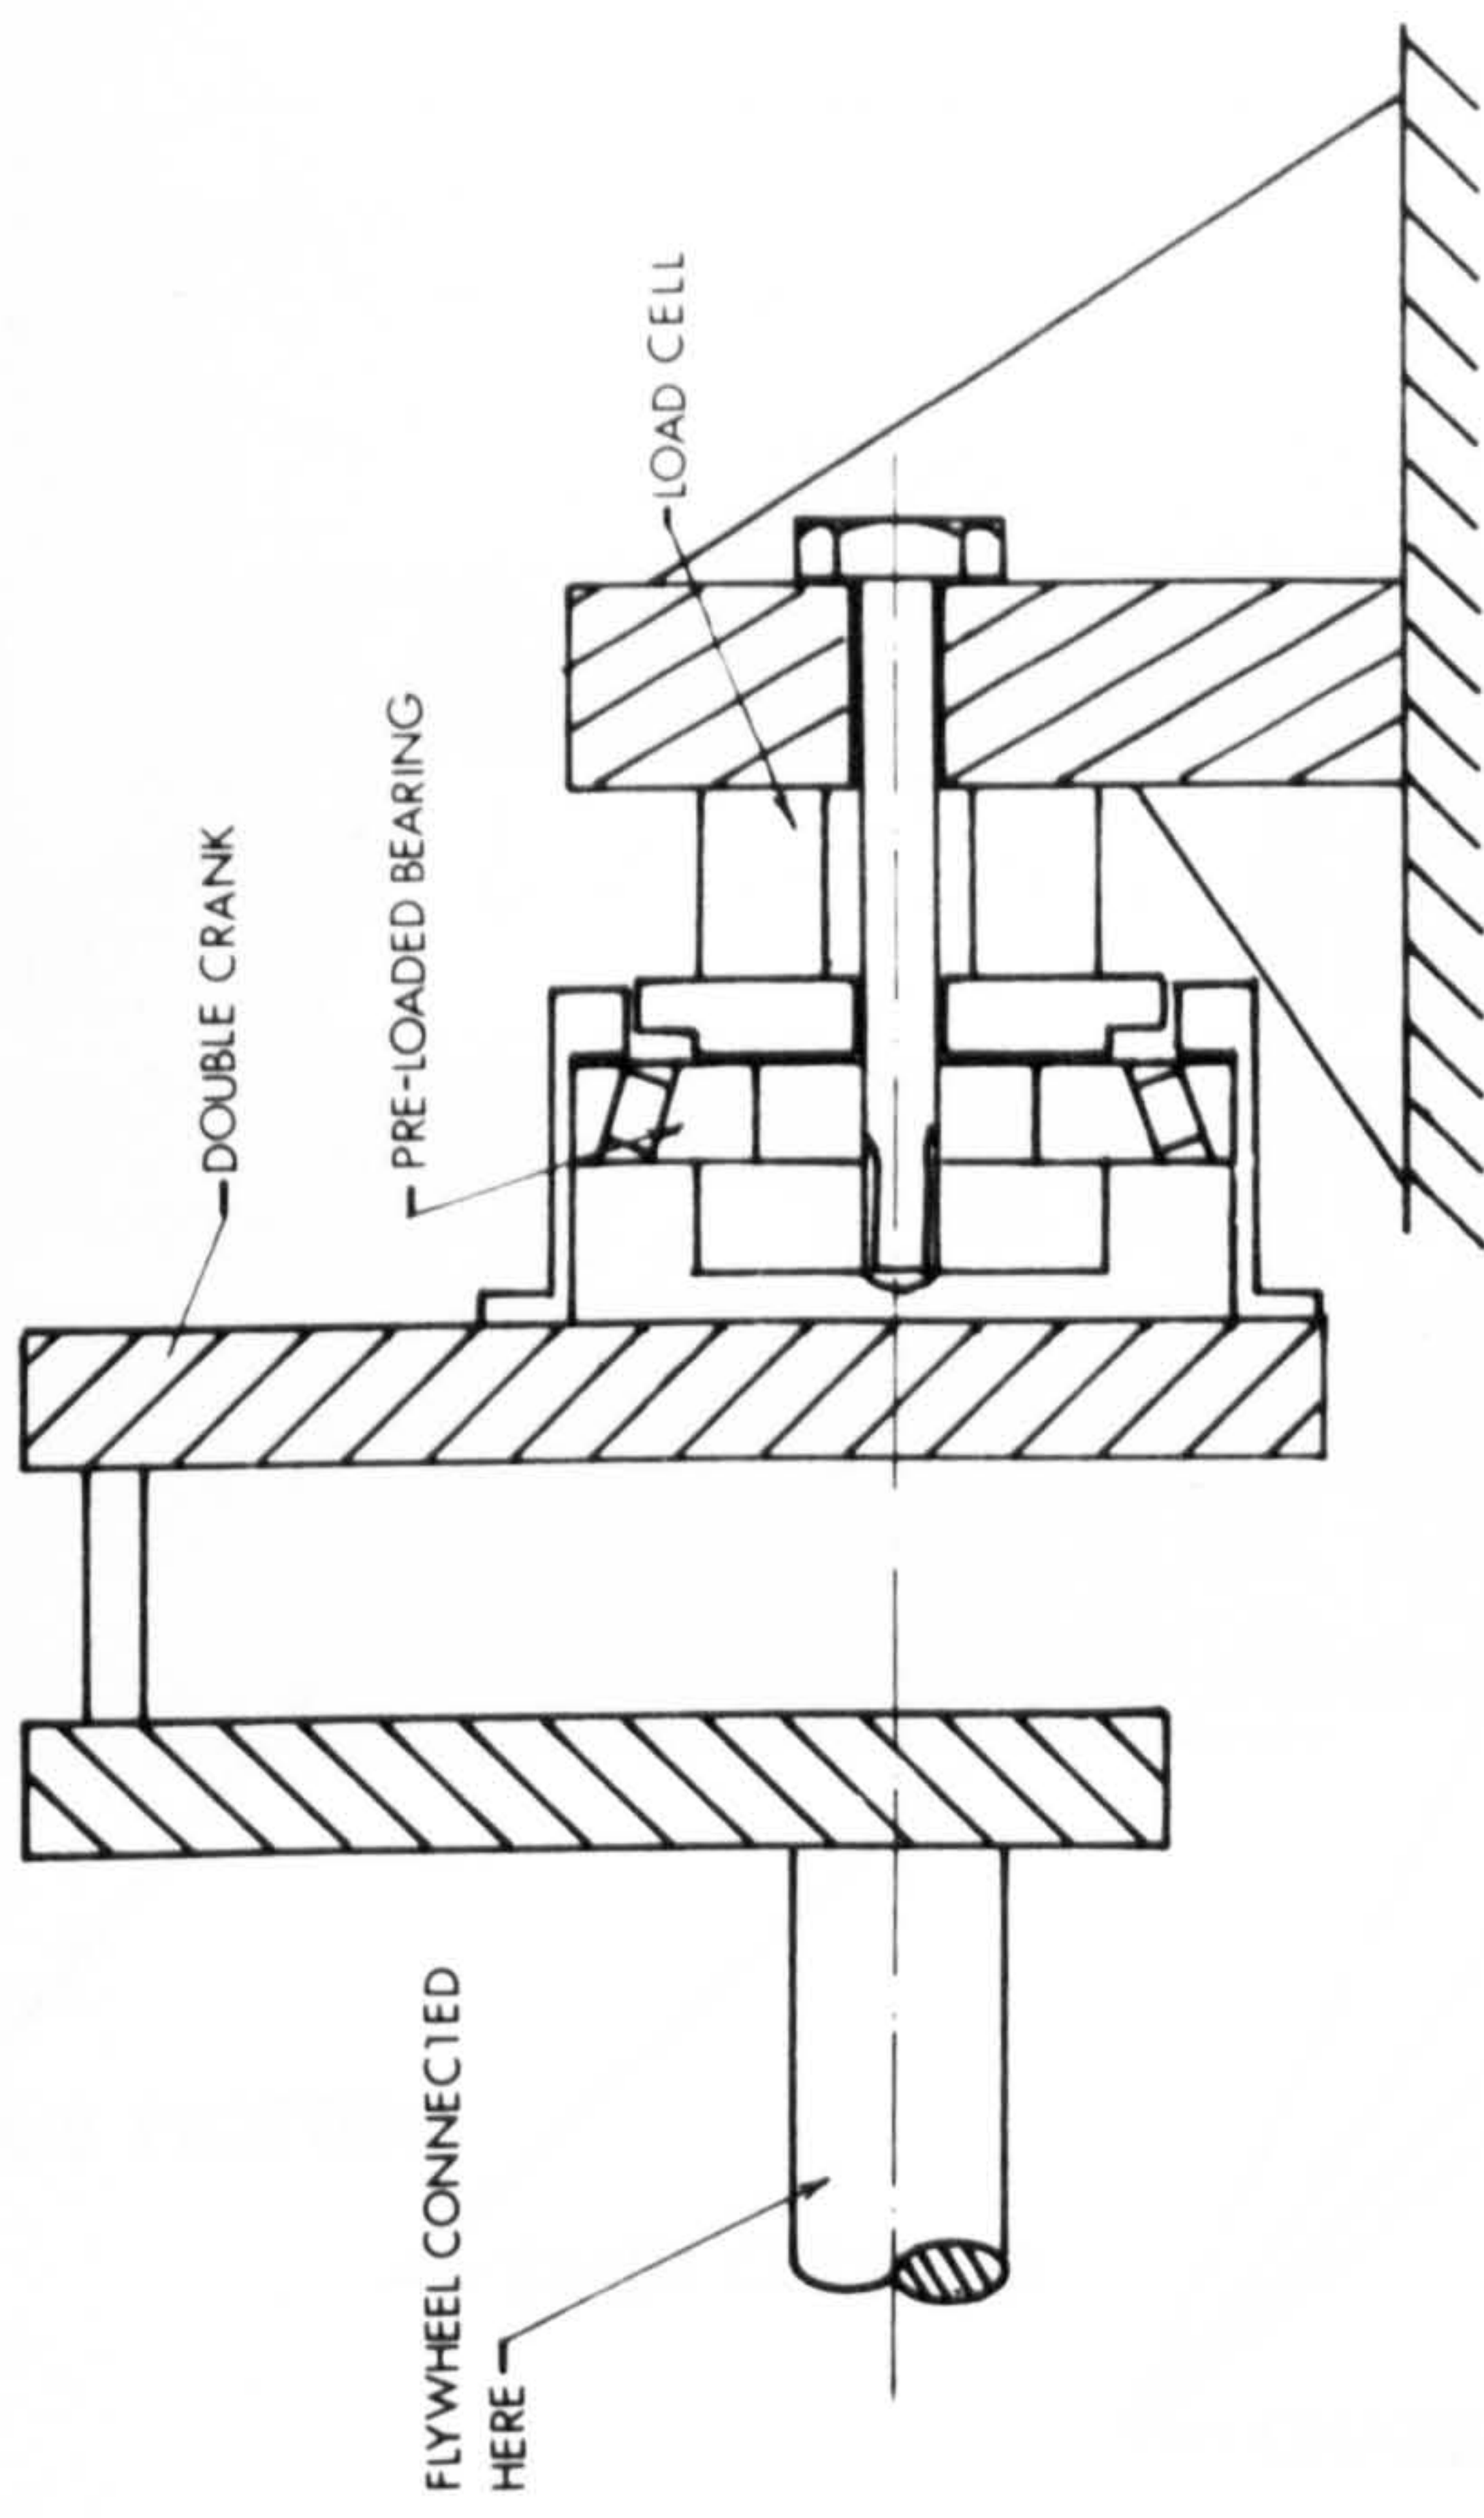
DRIVE SHAFT EXTERNAL TO THE LOAD CELL
